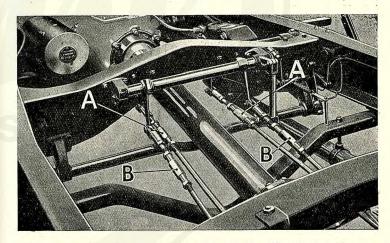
Showing Independent Adjusting Points for Rear Wheel Brakes. The nuts marked A are on the hand brake rods; the nuts B are for the pedal operated brakes.
